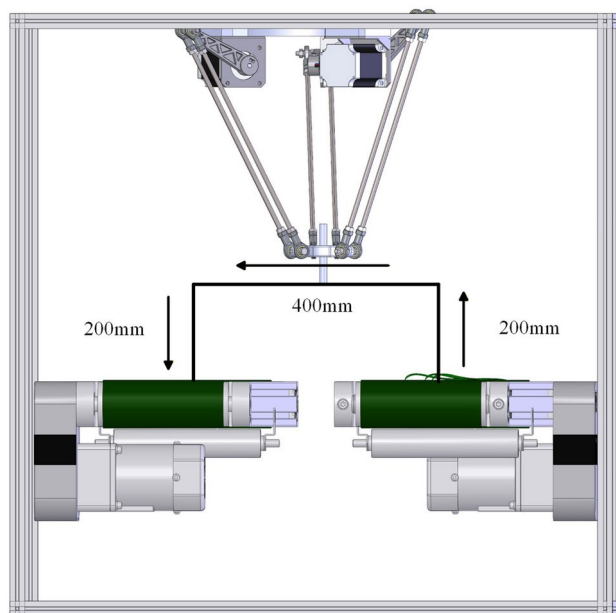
Front view of the overall assembly of the delta parallel robot.
